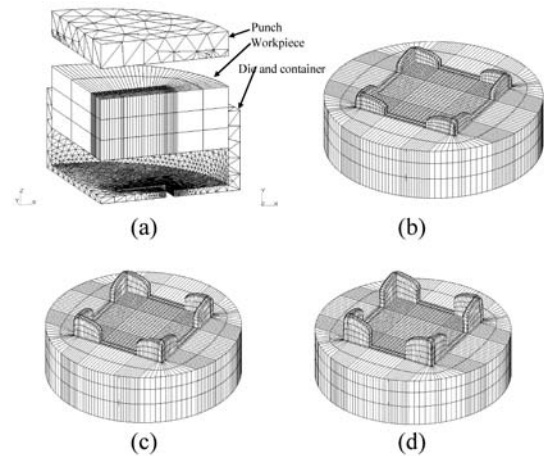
(a) Initial configuration of L-section die with four holes and deformed shape of the workpiece at various strokes: (b) 0.56 mm (c) 0.84 mm and (d) 1.16 mm [20]
